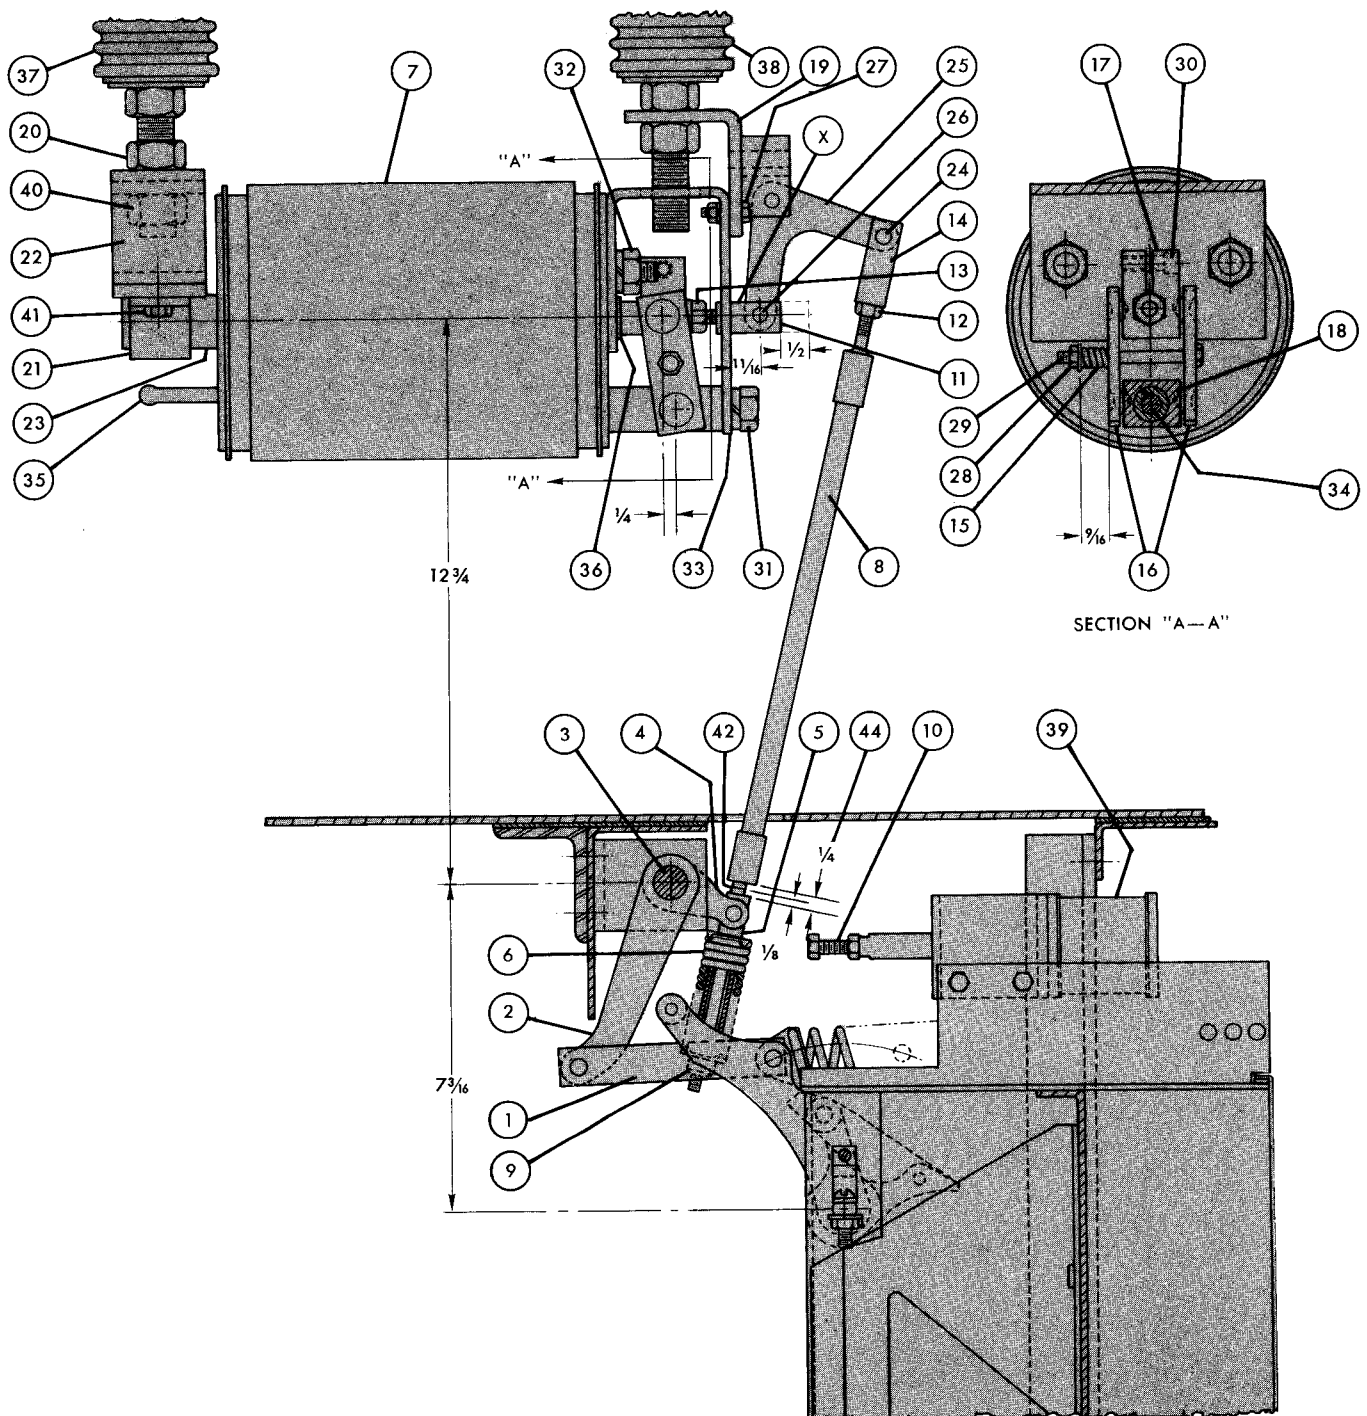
Vacuum Interrupter and Mechanical Linkage.
